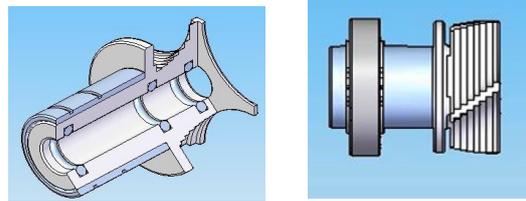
The left end: the rotating cylinder with the propeller on the one end and the ball bearing at the other.
